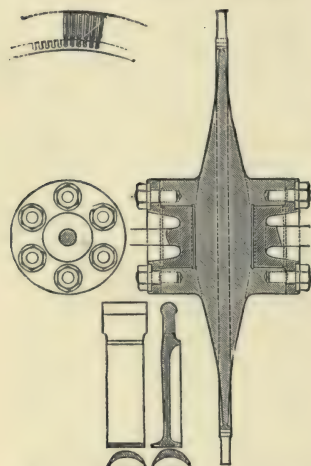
Solid De Laval wheel and method of blade fastening.
